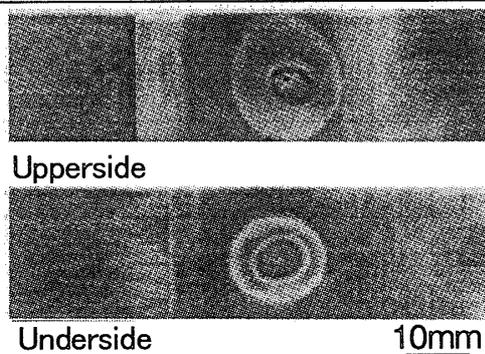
Surface appearance of welded joint. (Beam current : 1mA, Welding time : 9s, a_b : 0.4)
